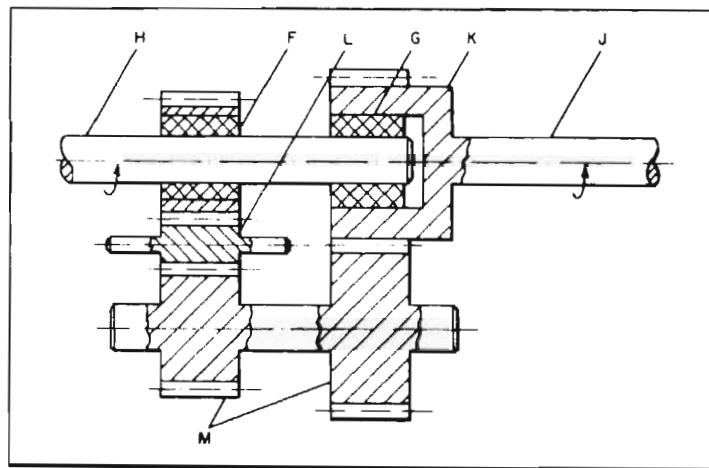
Spur gear set-up designed to accomplish the same purpose as bevel gearing shown in Fig. 7.
